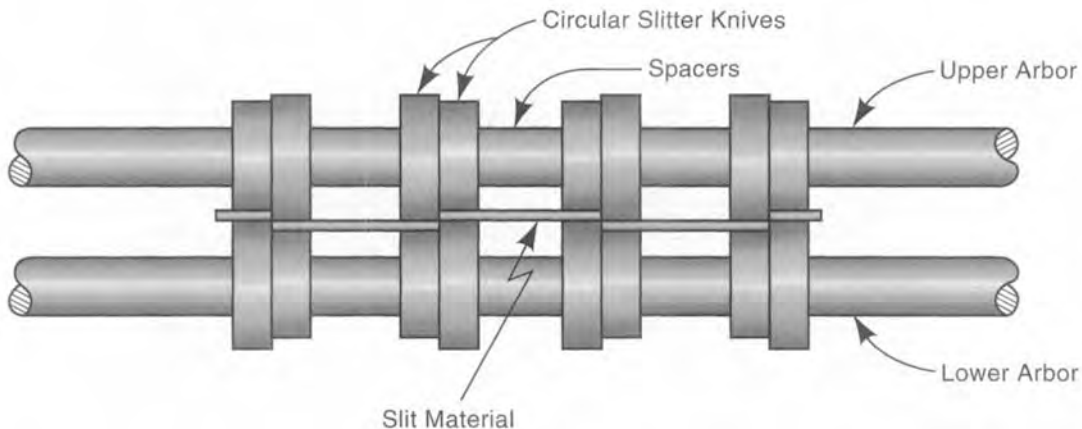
C3 Rotary slitting. Sharp edges of the circular slitting knives shear the sheet material.
